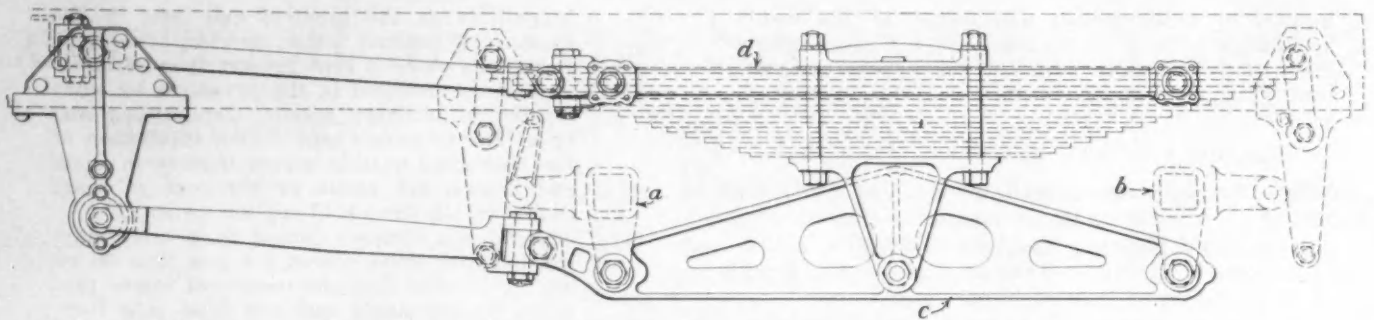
BALANCED REAR-WHEEL ARRANGEMENT OF SIX-WHEEL TRUCK
